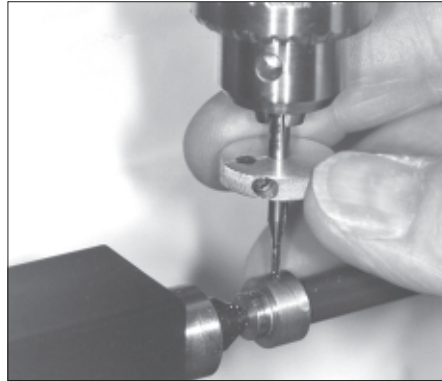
A handmade aluminum grip was utilized to gently tap threads in the sleeve and brake line.
